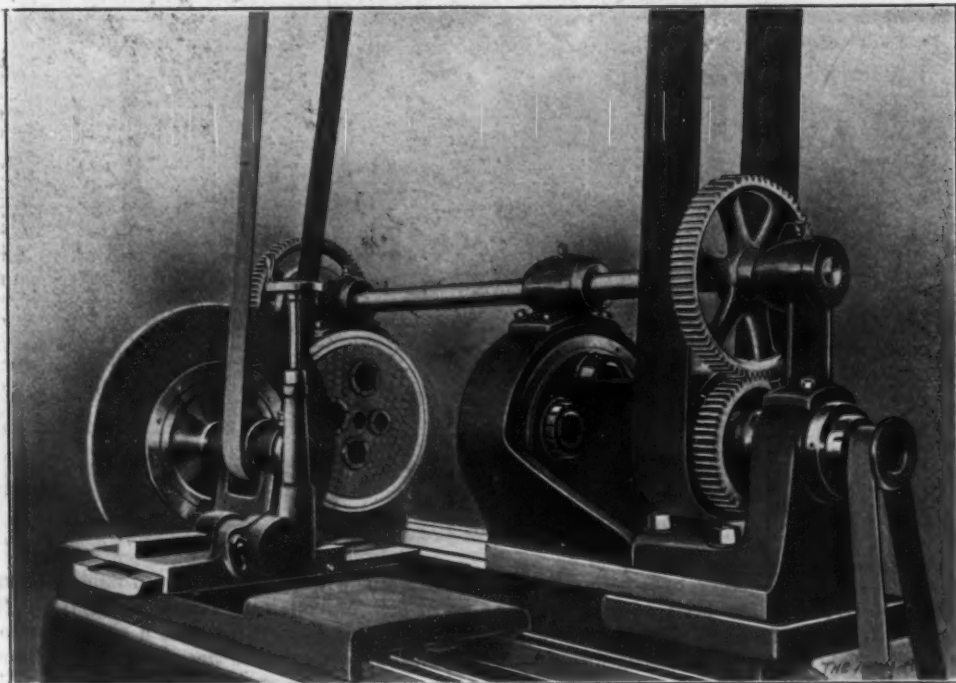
Rear View, Showing Grinding Wheel Mounting.
